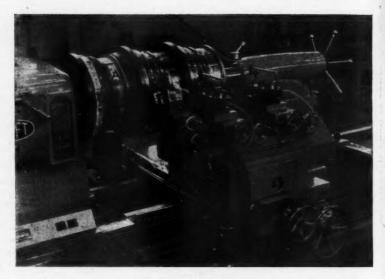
Close-up view showing two turbine casing components mounted on a mandrel on the Swift lathe, also the master from which the form is controlled
